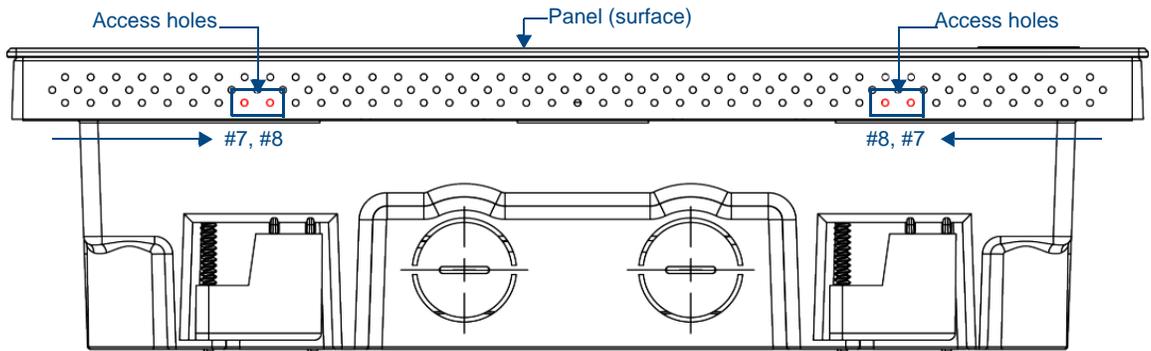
Bottom View (Landscape) or Right-Side View (Portrait) of the MXD-1000 showing access holes in molding
